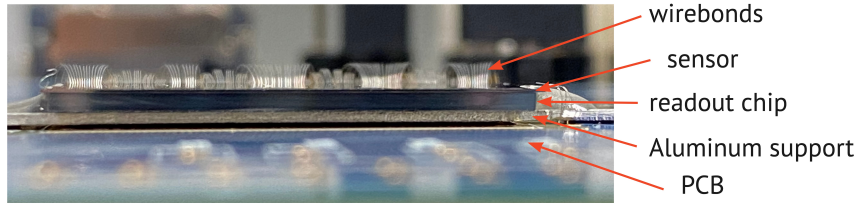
Cross sectional image of the hybrid module on top of the Aluminum support layer wire bonded to the PCB. Courtesy of MPP institute.
